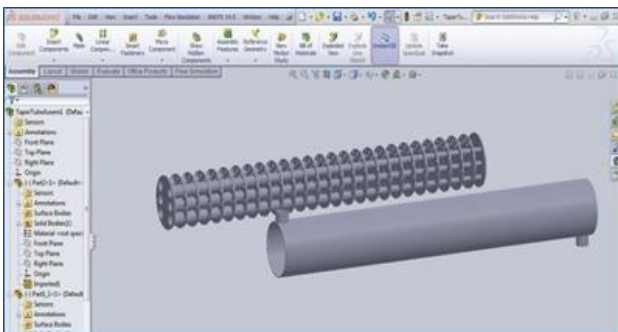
Disassemble view of Shell & Tube Type Heat Exchanger
